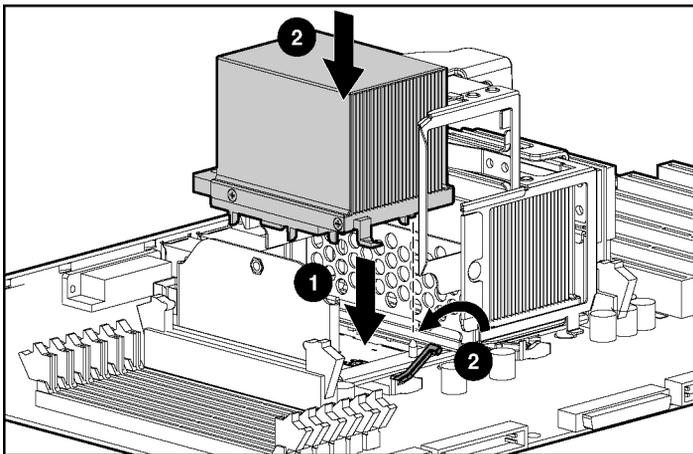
Installing the processor assembly and securing the processor locking lever
